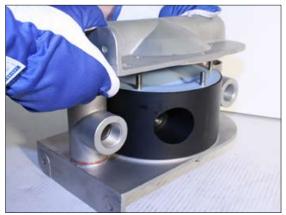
Carefully remove the "loose housing" (11) and lift off the in/outlets (13). Pull up the center block assembly, be careful not to damage the hole edges of the diaphragms (15).
